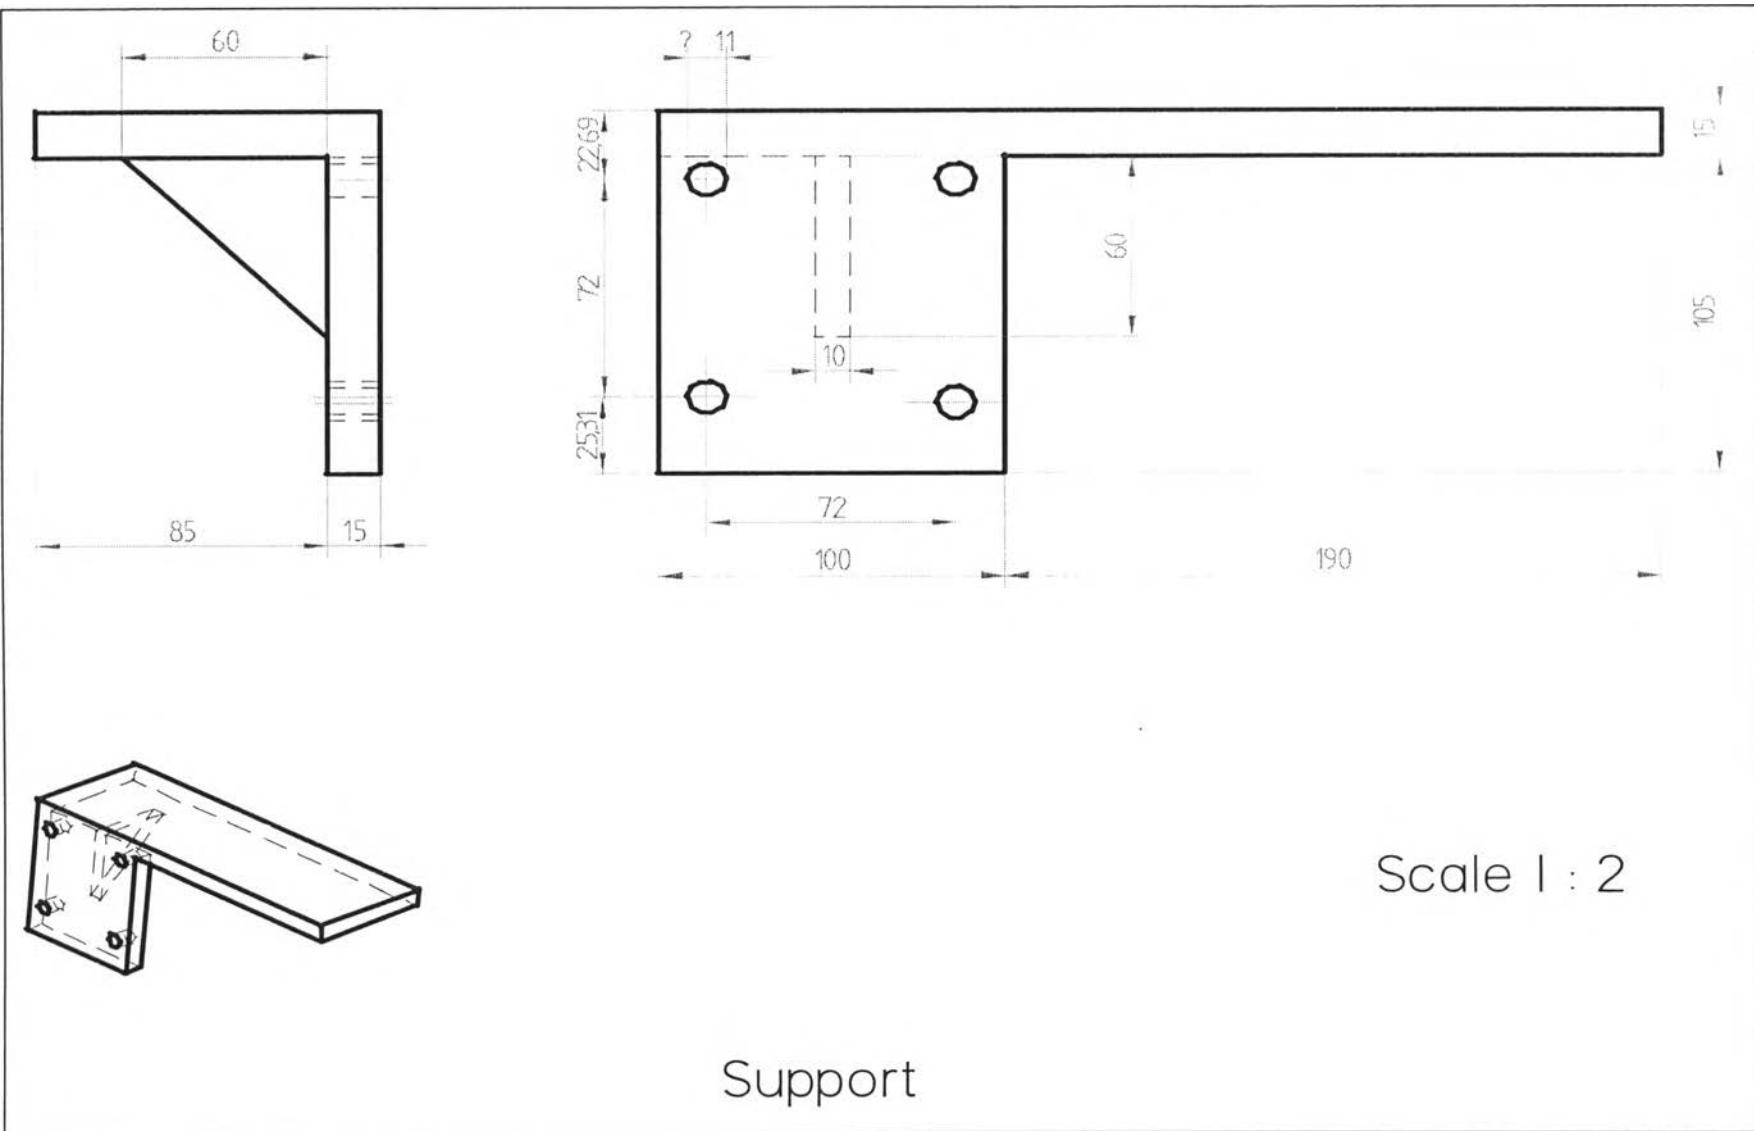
Drawing of Pneumatic Cylinder Support (Drive Side)
